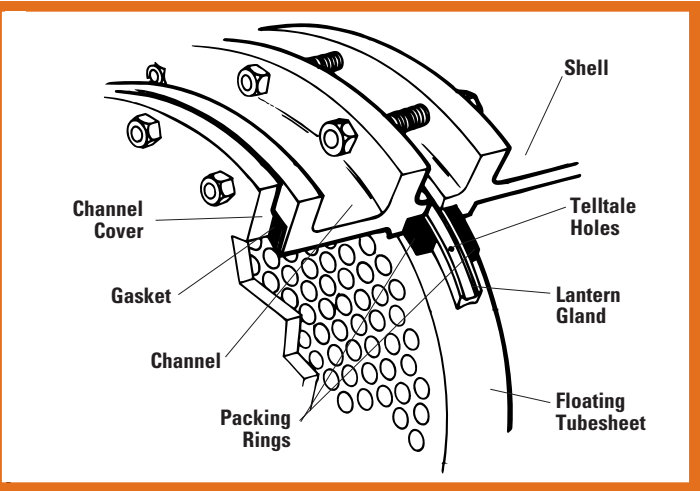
Construction detail of the packed end shows floating tubesheet, packing rings and lantern gland with telltale leak-off holes. Channel and cover construction permits quick access to tubes without disturbing packing.
